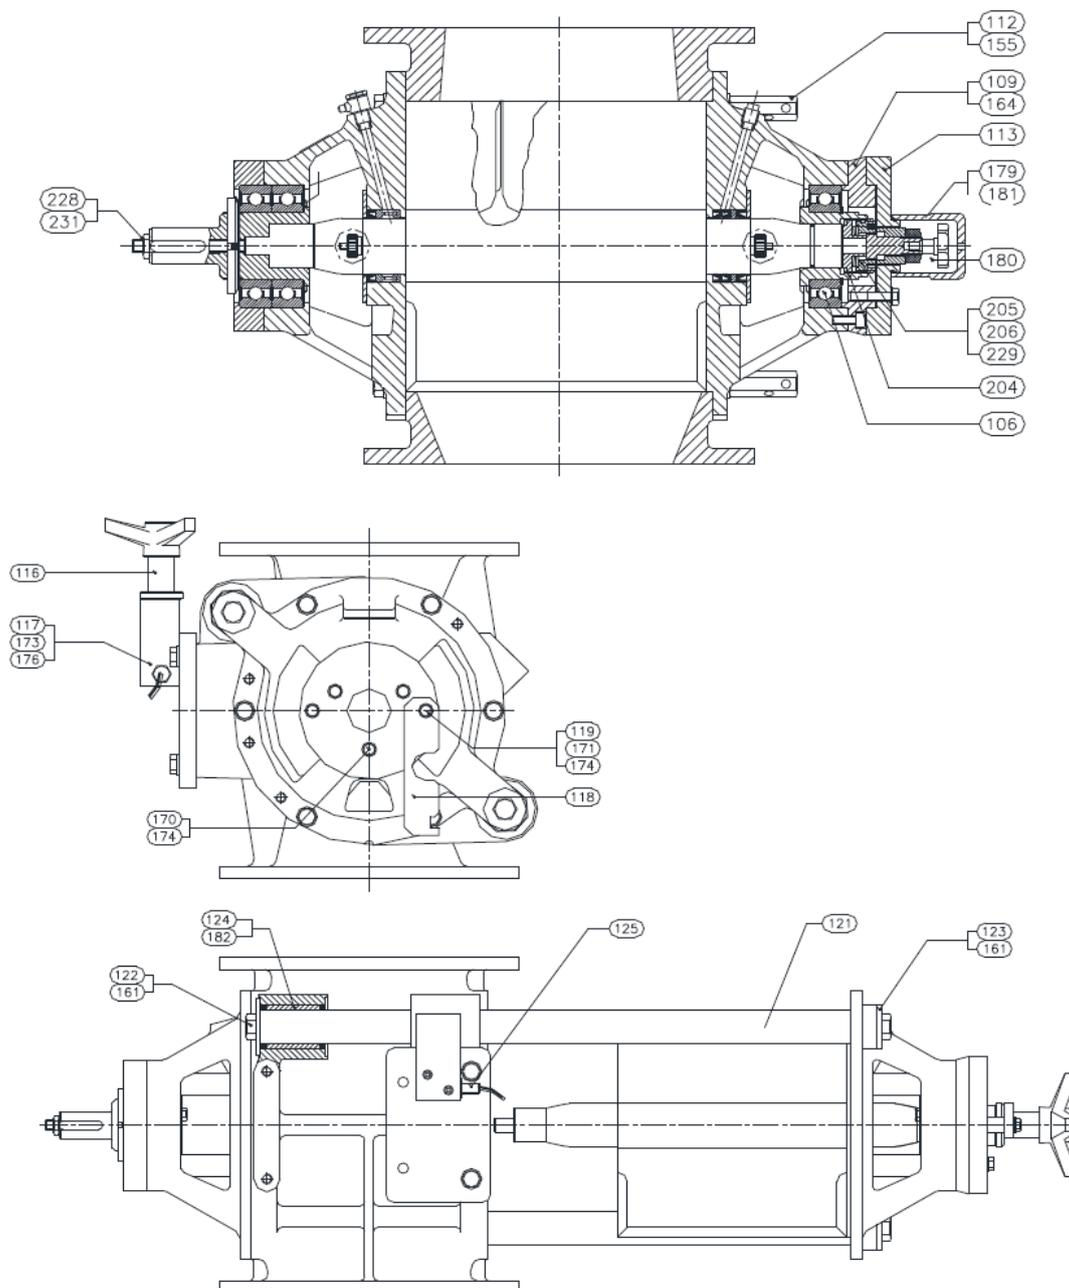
Drawing MZC parts (Dairy-WD-MZC)
